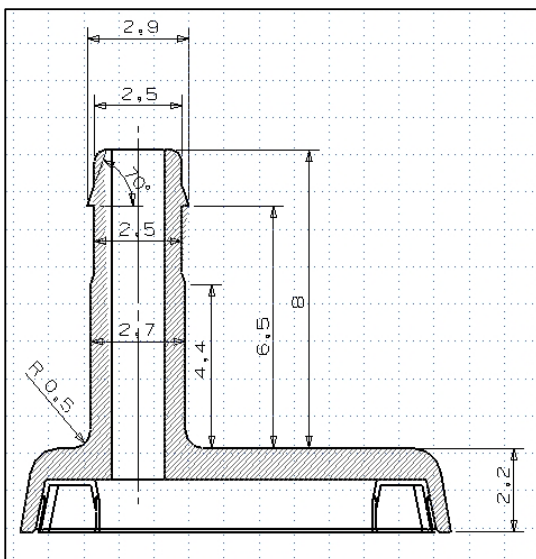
Mechanical drawing: Section A in Figure 11.4 of tube connection (type A)
